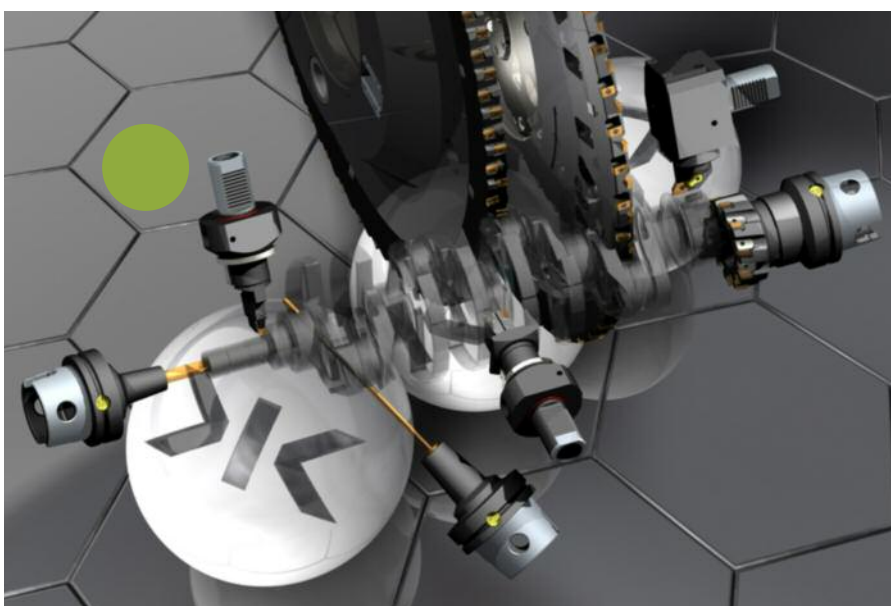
Complete solution of Crankshaft Machining with coated cemented carbide cutting inserts; upper protective coating: TiN (goldcoloured); the image demonstrates the different stages of finishing (drilling, milling, turning); about 8 kg of metal chips are formed on machining. Courtesy of KENNAMETAL INC.
